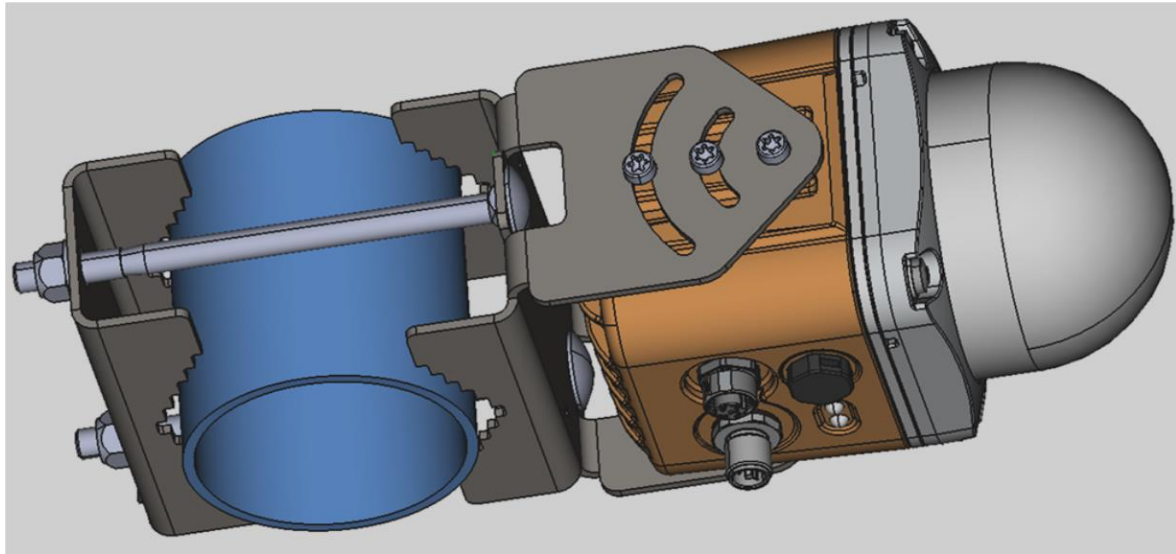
LPR®-1DHP-291 mounted to a pipe with the mounting bracket
